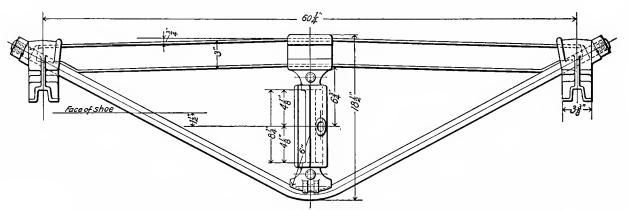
Trussed Brake Beam. Pennsylvania Brake Beam Company.
